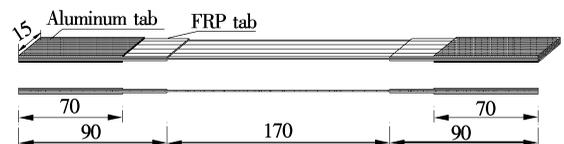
Details of CFRP and CF specimens (unit: mm)
